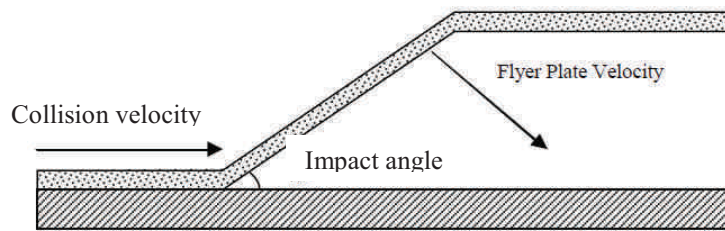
Welding parameters common to MPW and EXW [8]
